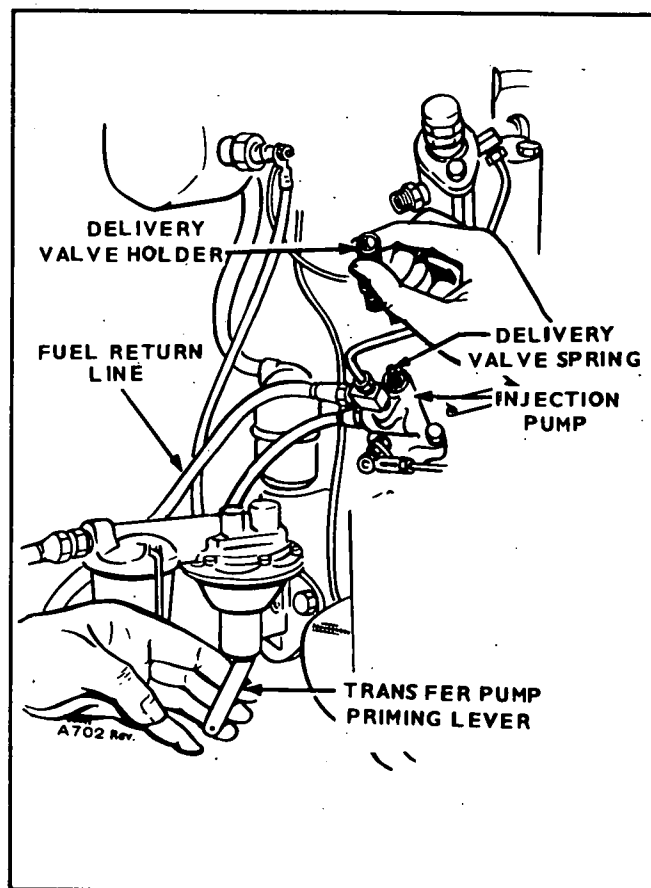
LOOSENING DELIVERY VALVE HOLDER
